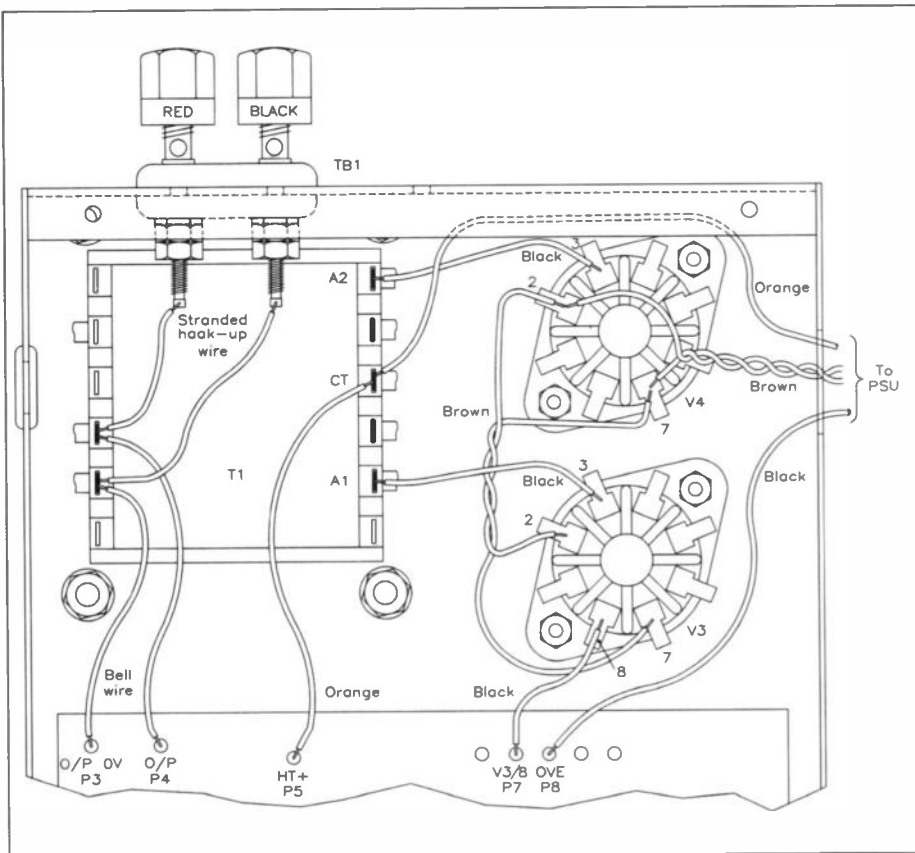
Wiring the PCB, T1 and octal sockets for V3 & V4 T1 and PCB supply, PCB earth connections and speaker connections, anode links to T1, wire link between V3 pin 8 and PCB.
